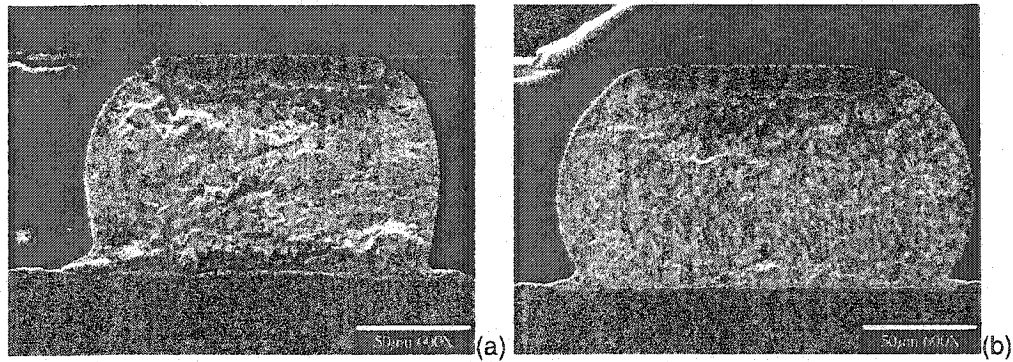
Secondary SEM of (a) solder joint A ($1.13 \times 10^4 A/cm^2$) (b) solder joint B ($0.88 \times 10^4 A/cm^2$) on Module #12 after 36 hrs 1A stressing
